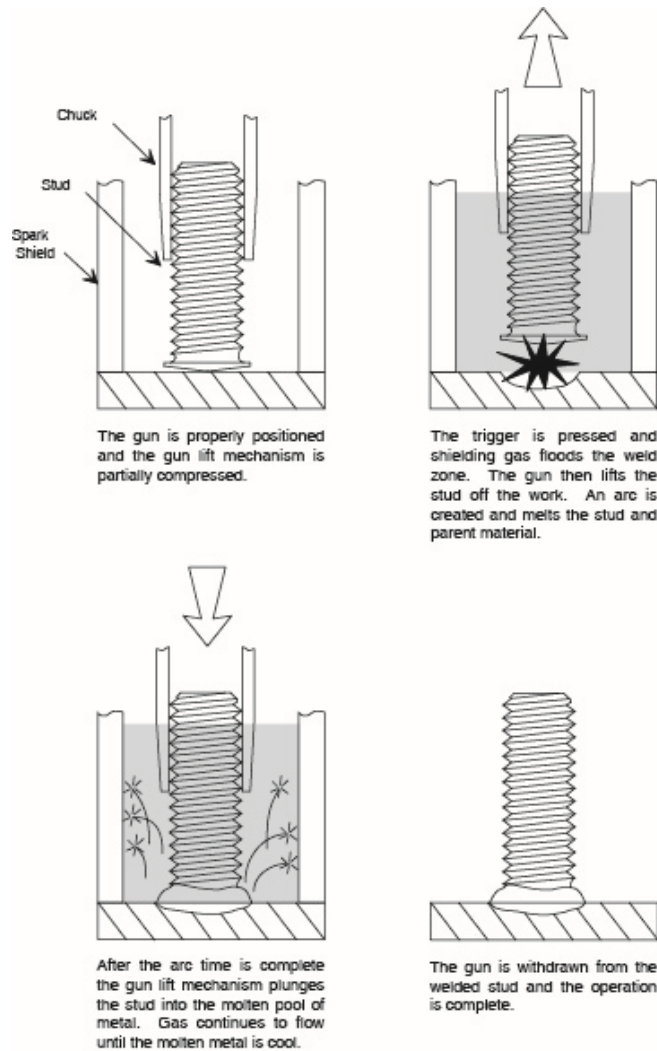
Gas arc stud welding process.¹⁻⁴
